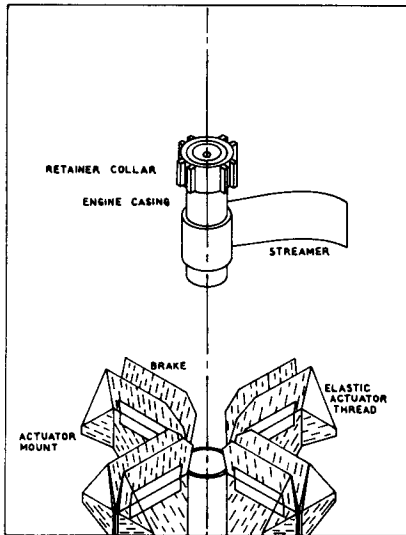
One possible type of fin-brake system, using elastic thread to actuate split flaps at the fin trailing edge.
